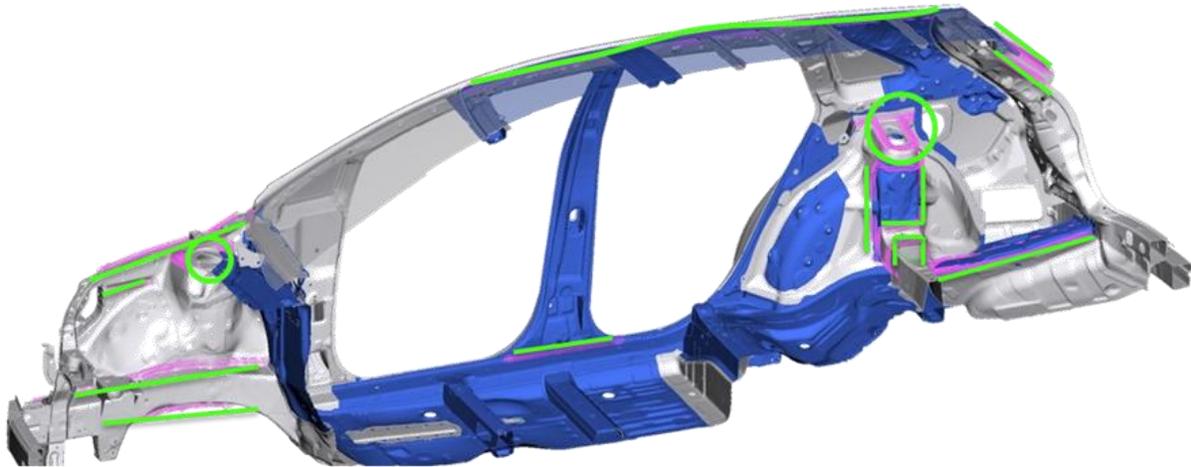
Laser Welds Application on Body Structure
